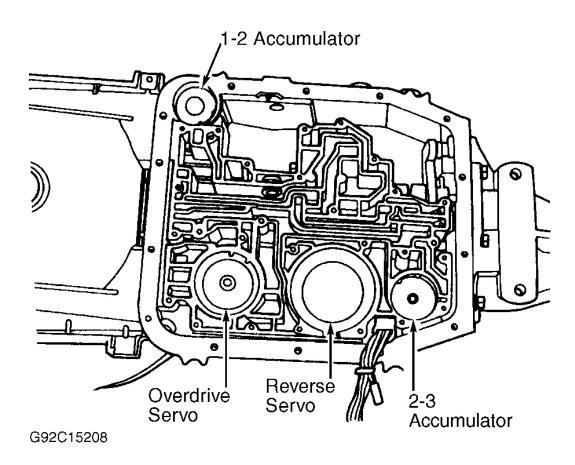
Identifying Accumulator & Servo Locations Courtesy of FORD MOTOR CO.
